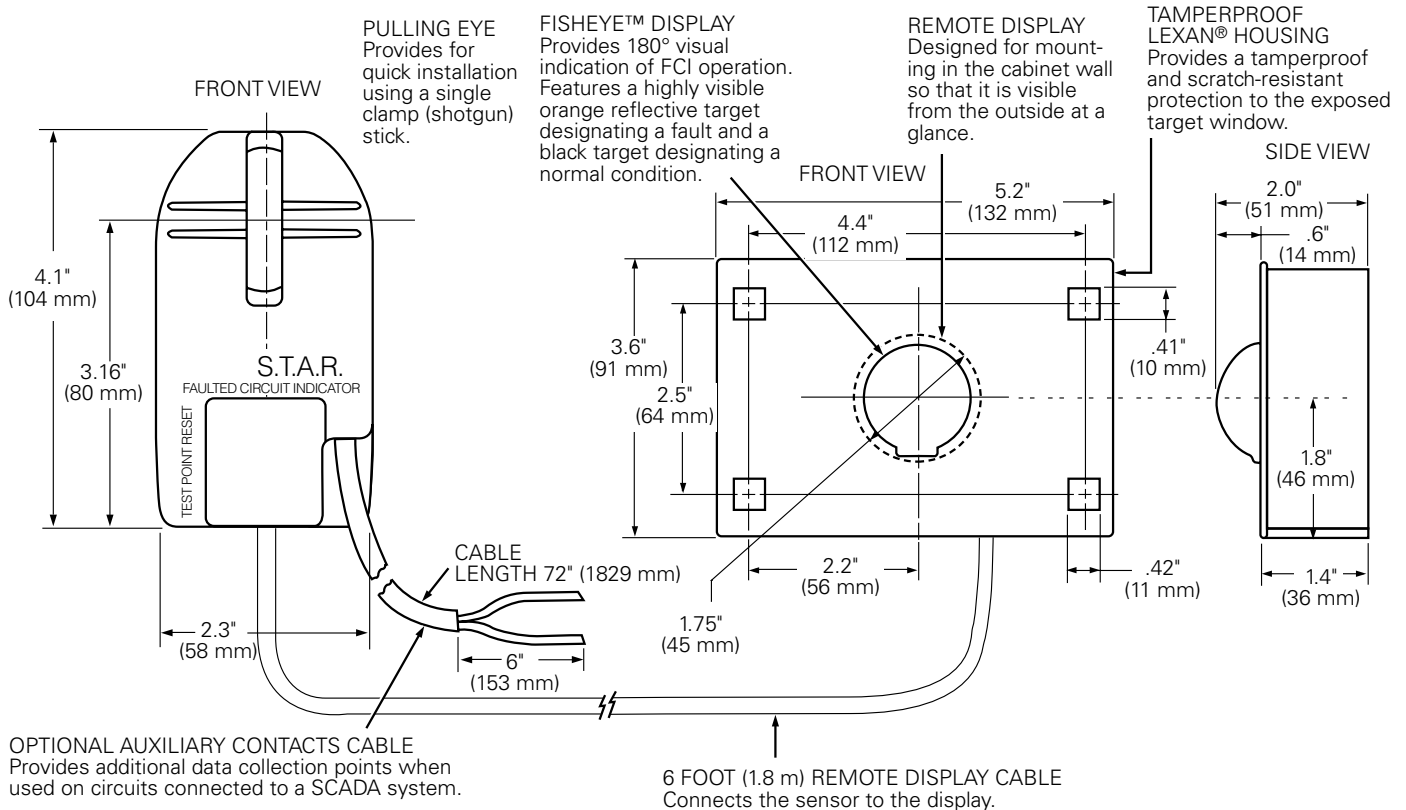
Features and dimensions of a TPR faulted circuit indicator with remote FISHEYE™ display and auxiliary contacts.
